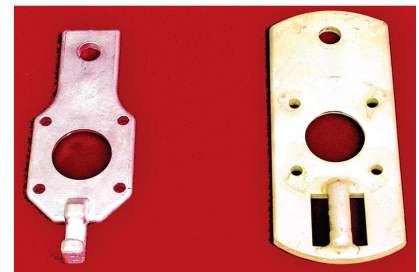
View shows present cast fuse main contact at left and previous main contact, which was a weldment, at right (removed from fuse mounting).
